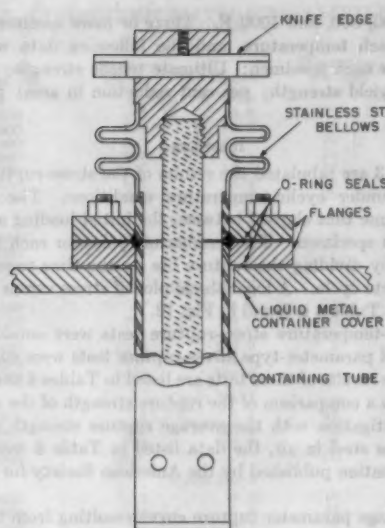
SPECIMEN AND LOAD-BAR ASSEMBLY—UPPER PORTION
